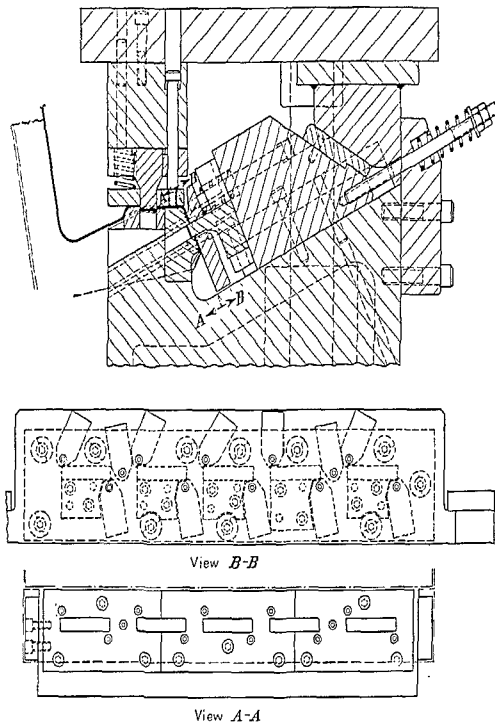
Cam-actuated slotting die for backspasher (workpiece shown in Fig. 12-13).
